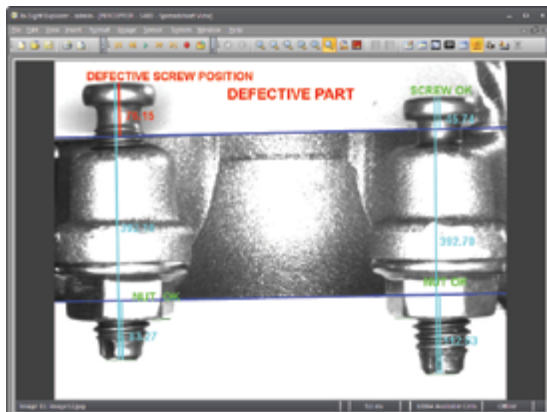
Machine vision inspection of a part just after an operator has installed two screws and two nuts. The inspection ensures that the screws are completely inserted and that the nuts are installed correctly.
